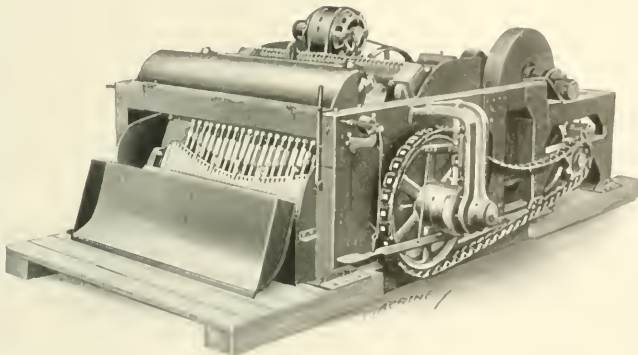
Lewis Spring Machine with Cover opened to show Forming Holder
